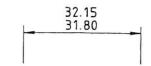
Linear dimension toleranced by specifying limits of size directly
